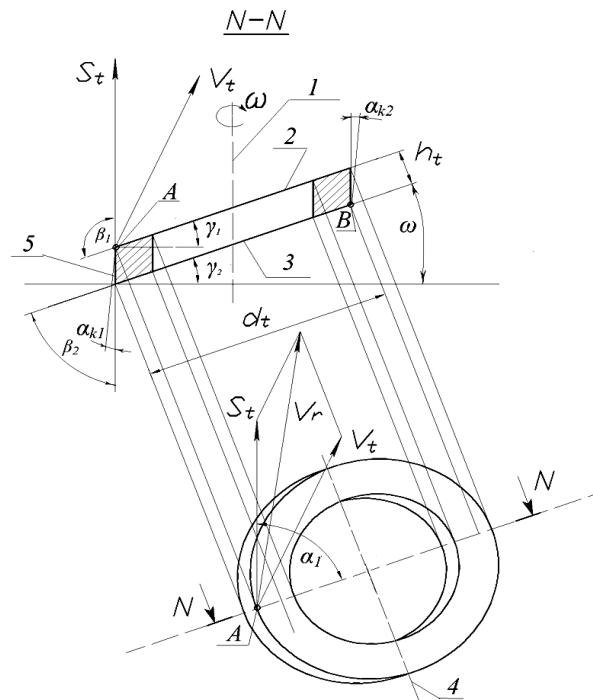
Scheme for determining the working angles of a cutting tooth of a drilling tool
